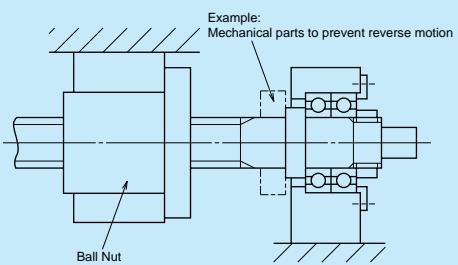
Nut and ball screw are required to be separated when installing in this structure.
